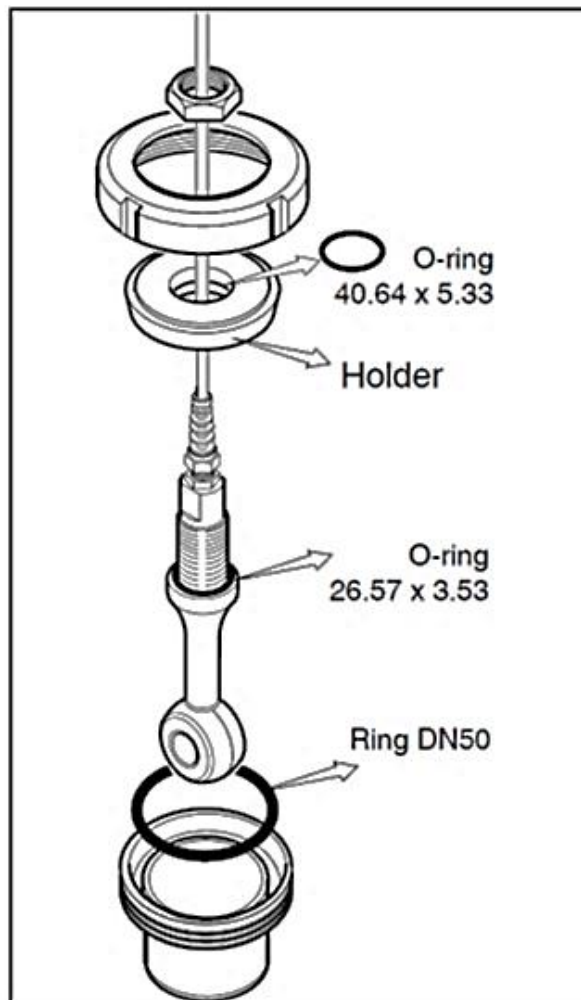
ISC40G(S) in weld-in subassembly ISC40FS-SCWN
